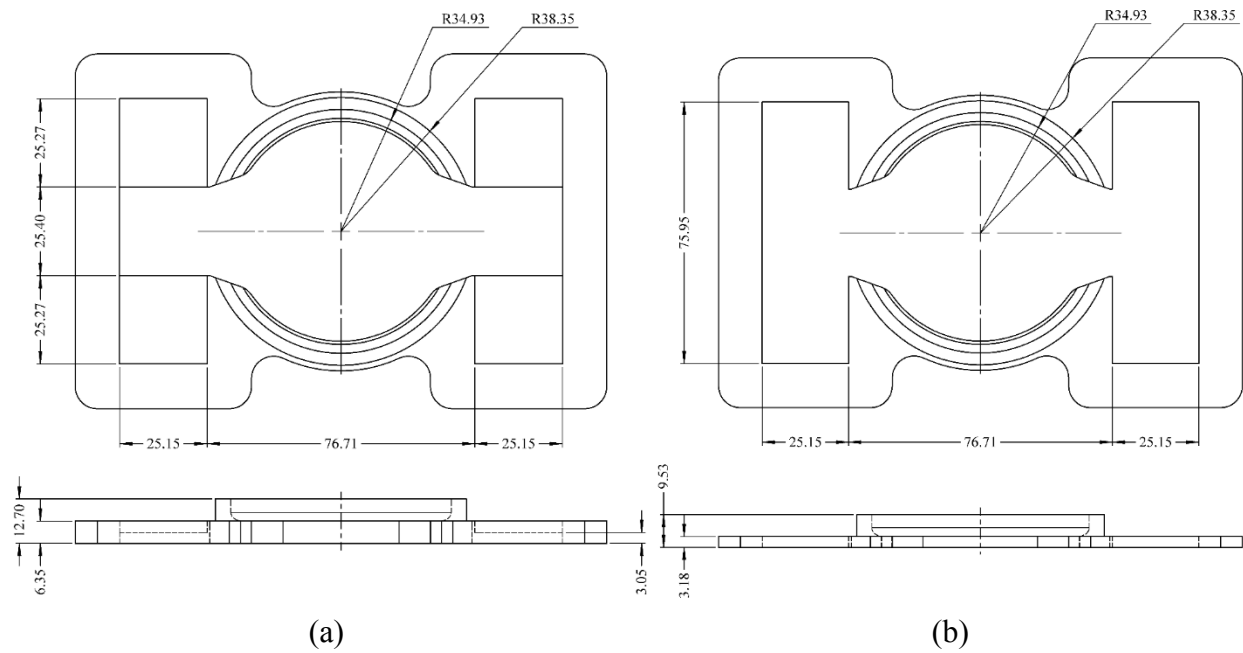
Technical drawing of the LVI jig components: (a) lower and (b) upper, dimensions in mm
